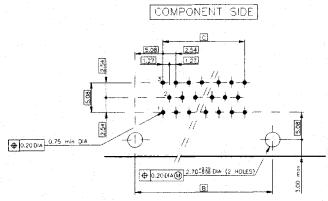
MOUNTING PATTERN, DAUGHTERBOARD APPLICATION, OR IN LINE ARRANGEMENT BOARD-TO-BOARD CONNECTION, (RECOMMENDED PCB HOLE CONFIGURATION).
